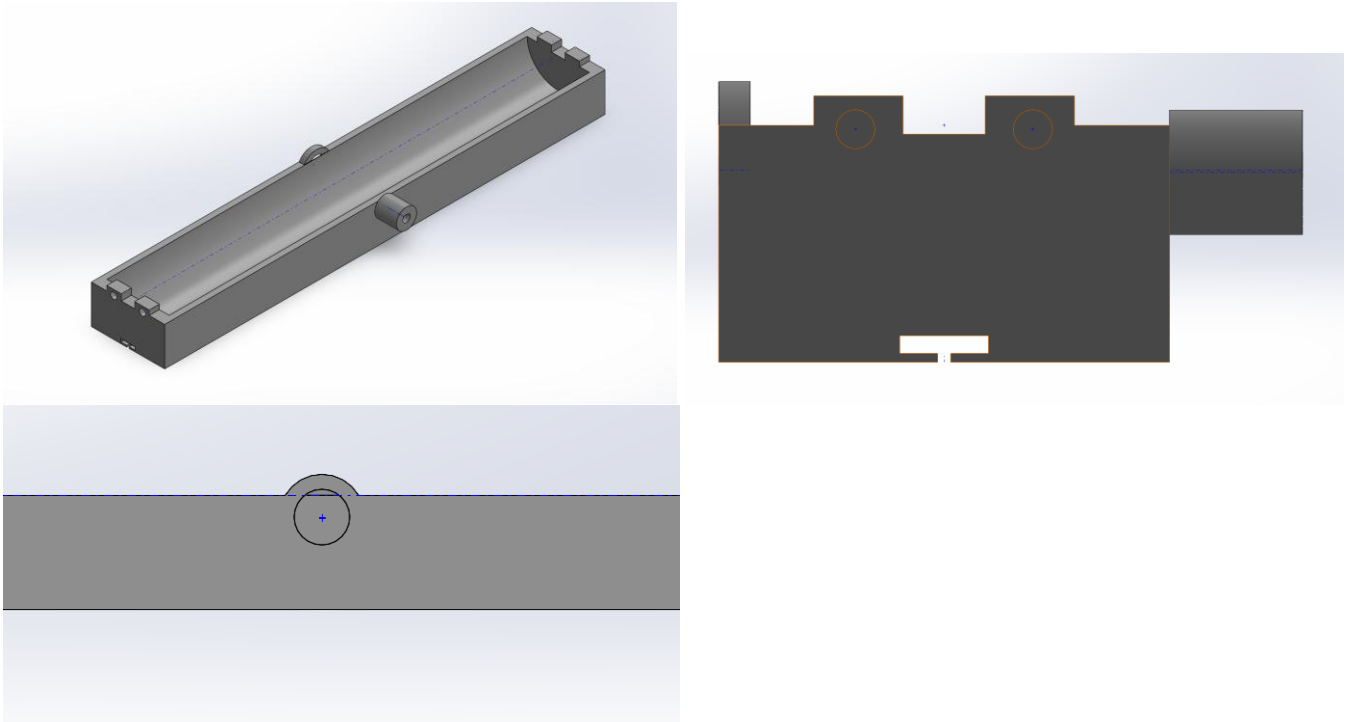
View of the Beam CAD and close up look at wire channel and bearing mount
